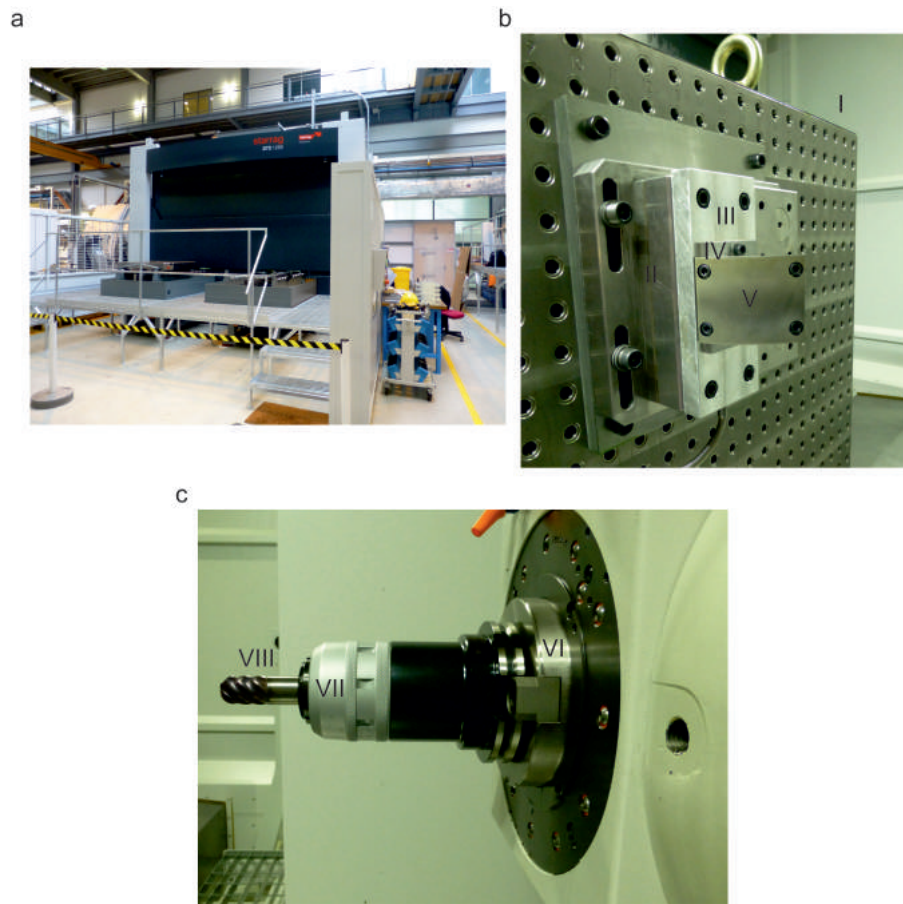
Photograph of a. the Starrag STC 1250 milling centre, b. wire-EDM coupon and fixture assembly and c. 20 mm ball nose end mill tool and holder assembly.
